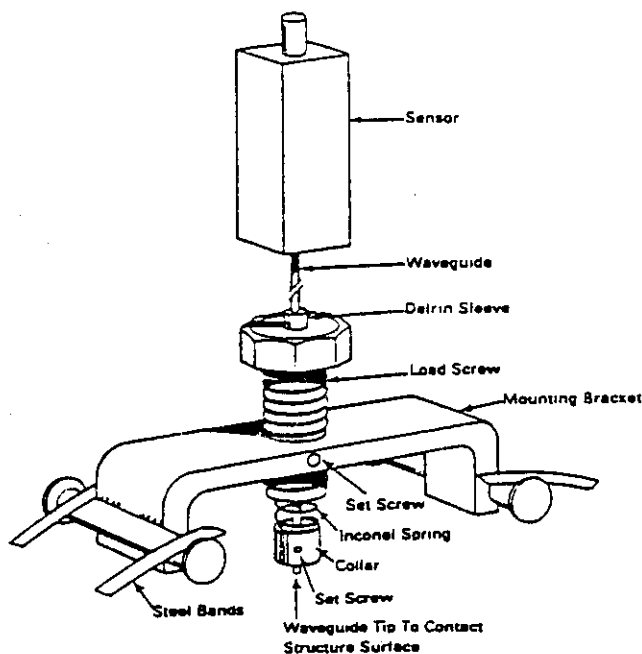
MOUNTING FIXTURE FOR STEEL WAVEGUIDE AE SENSOR
